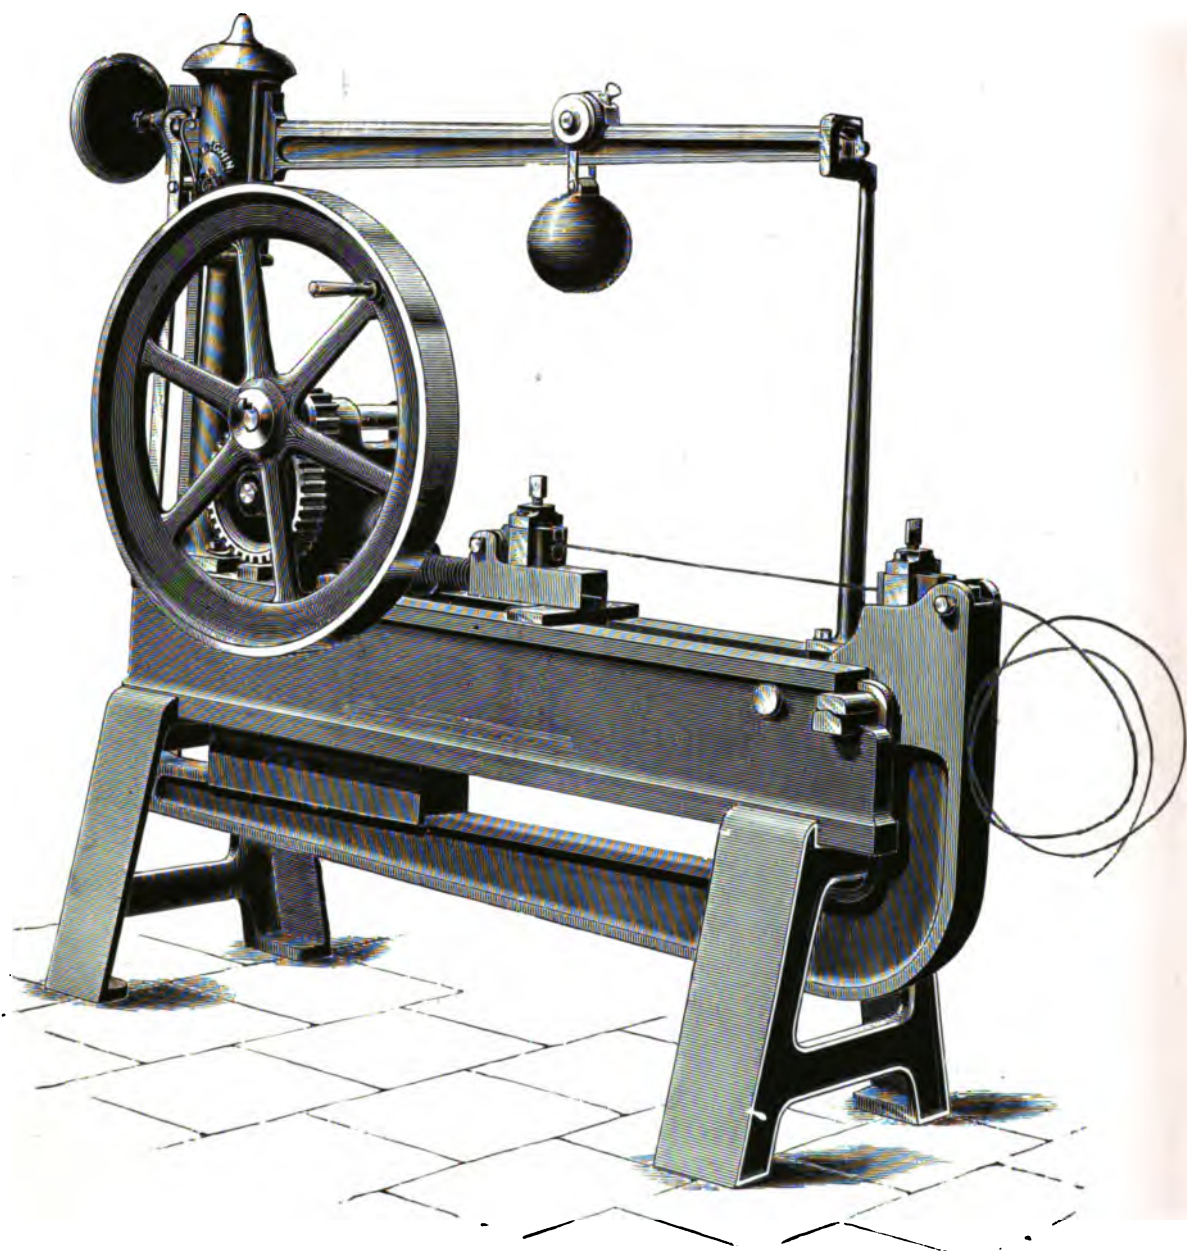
KITCHIN'S WIRE-TESTING MACHINE.
